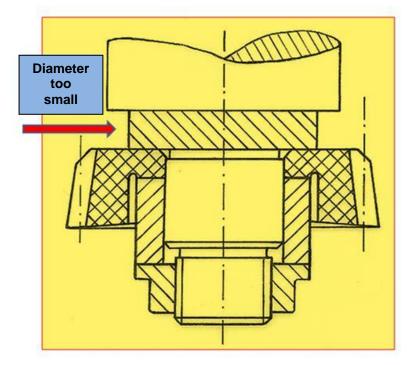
Incorrect mounting, because the upper spacer has a diameter too small
